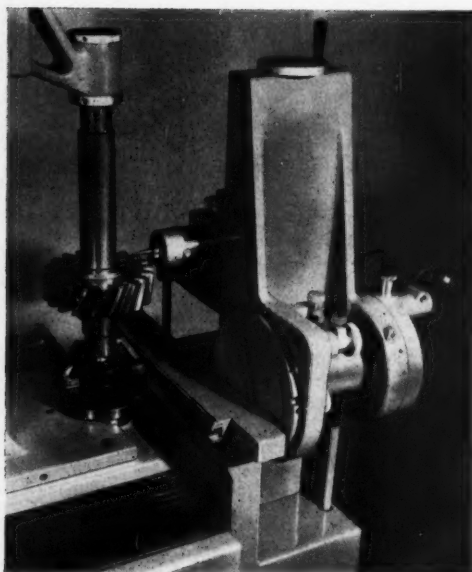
A close-up view of the David Brown No. 18 machine set up for checking the helix angle of a gear
